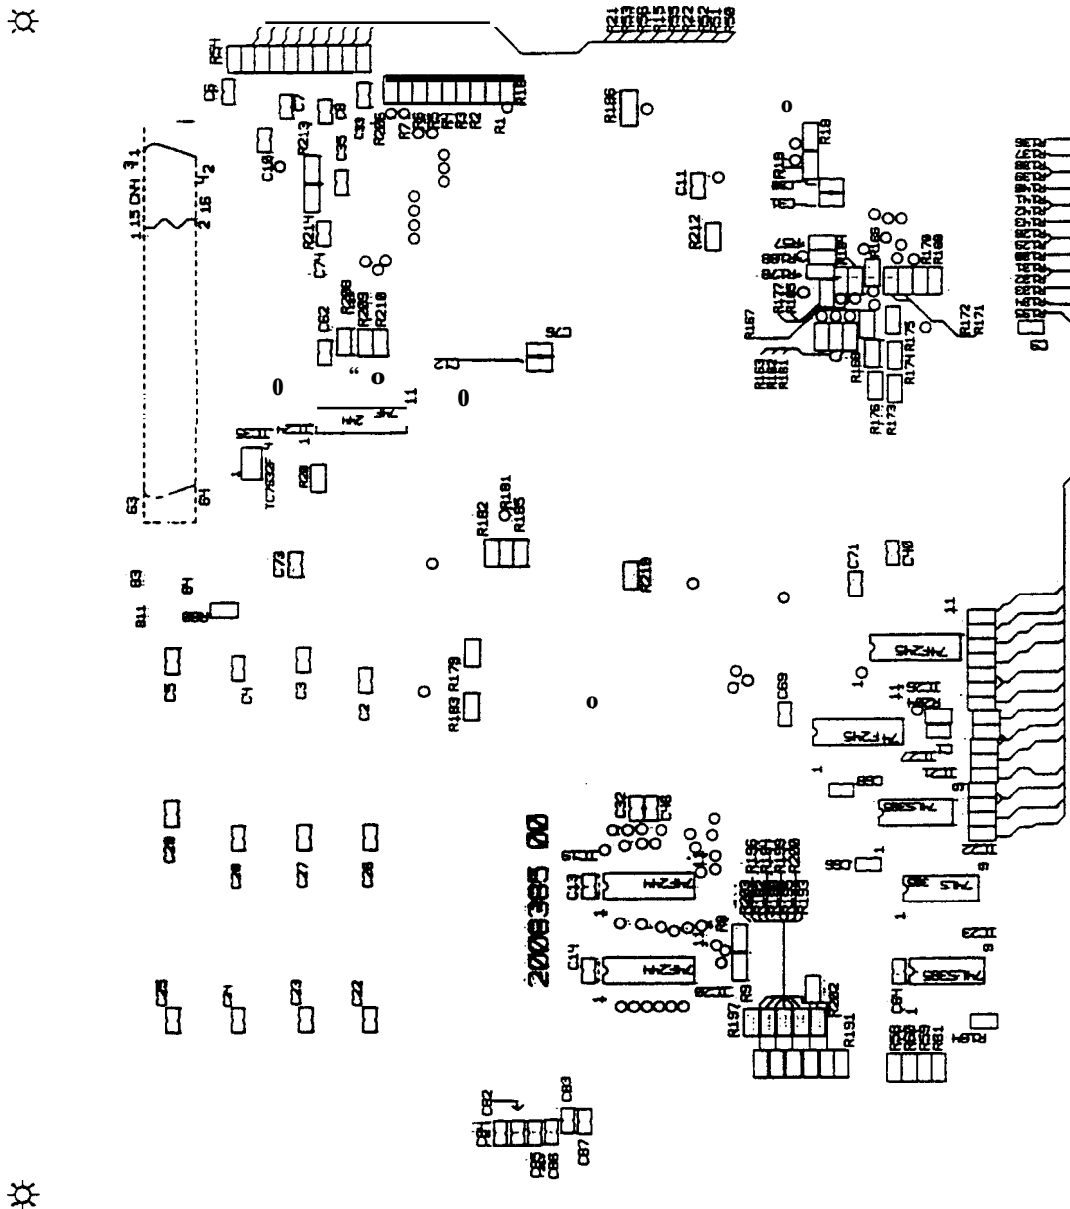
C108 MAIN Board Component Layout (Back Side)
